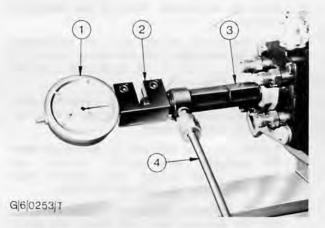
Timing and pre-stroke adjustment Dial guage Special Tool No. 1687 233 012
